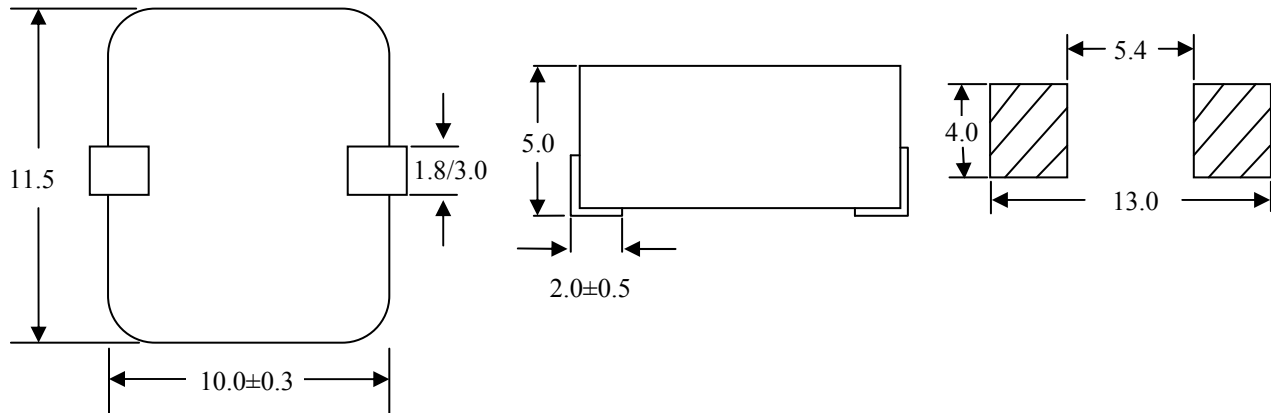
Mechanical Dimensions for ATIN-1050 Series Inductors
